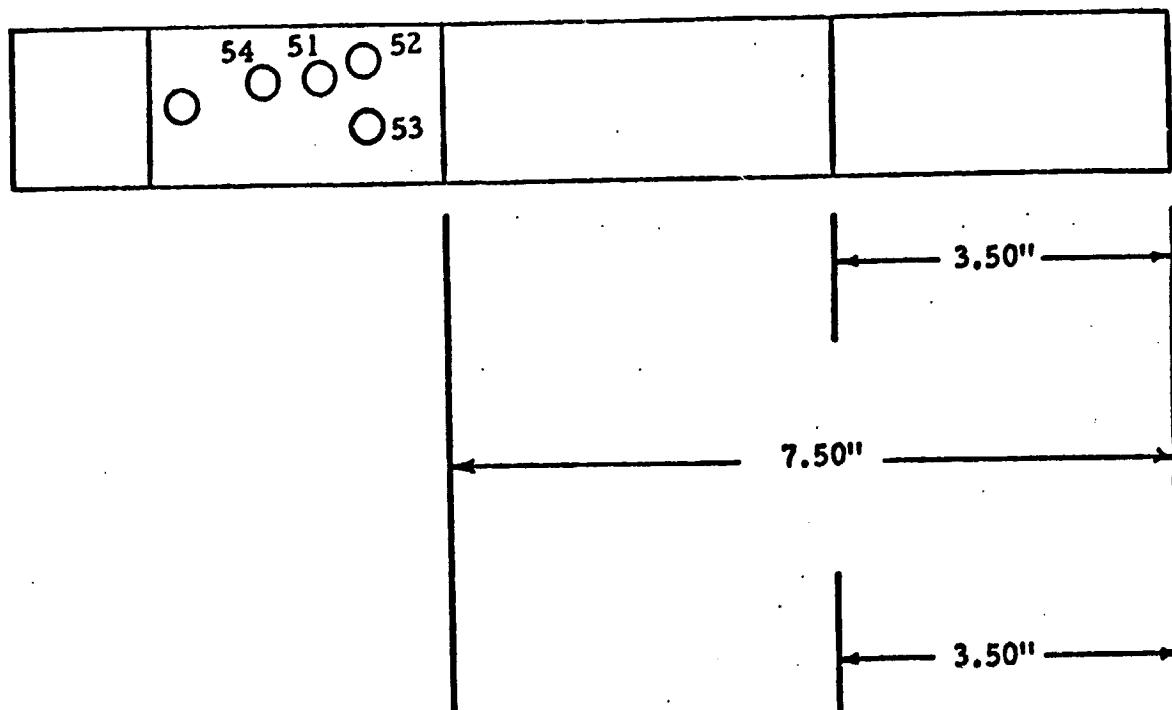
TYPICAL SIDE MOUNT TUNNEL INSTALLATION
